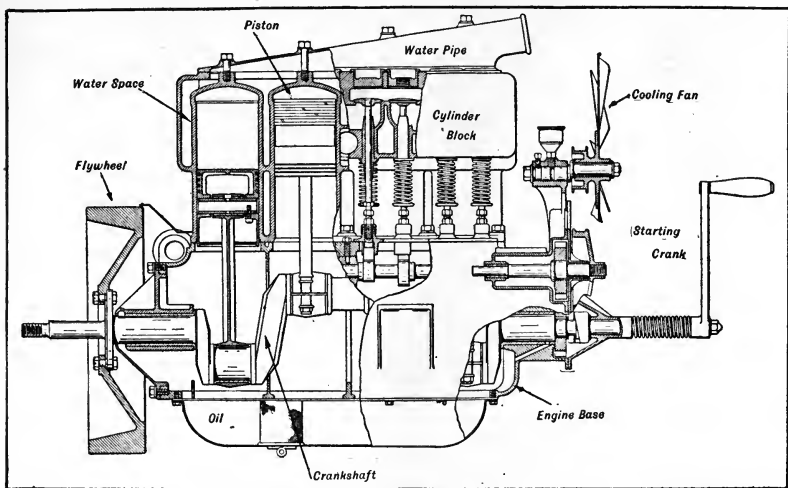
Sectional View of Four-Cylinder Motor, the Most Widely Used Type of Multiple Engine.
